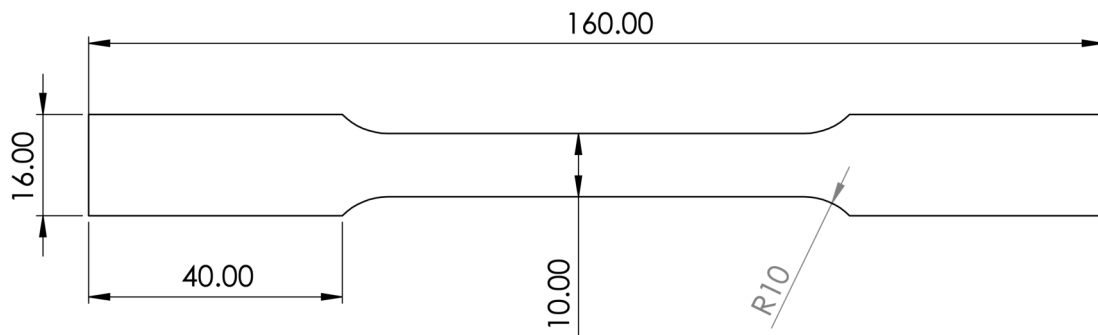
Drawing of the tensile specimen used for testing. All dimensions are in mm
